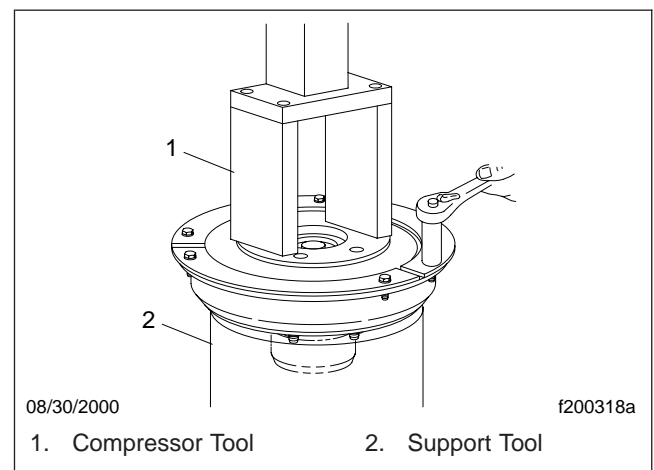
, Caging the Engagement Spring and Removing the Lining Retaining Plates
